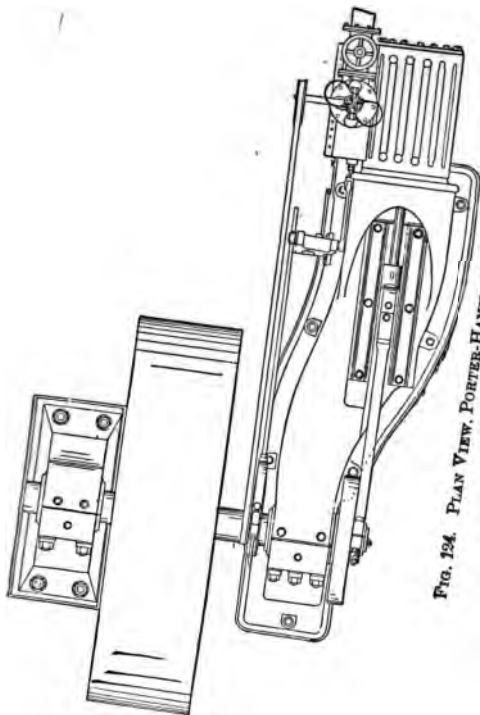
PLAN VIEW, PORTER-HAMILTON ENGINE.
